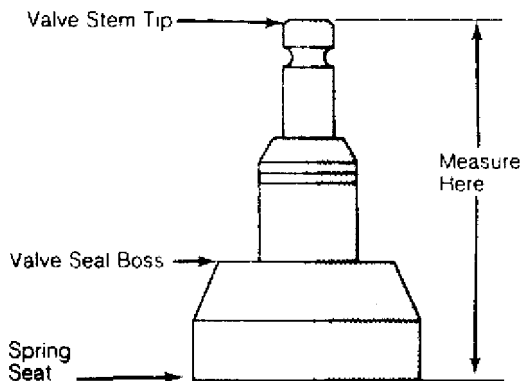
Measuring Valve Stem Installed Height - Typical
